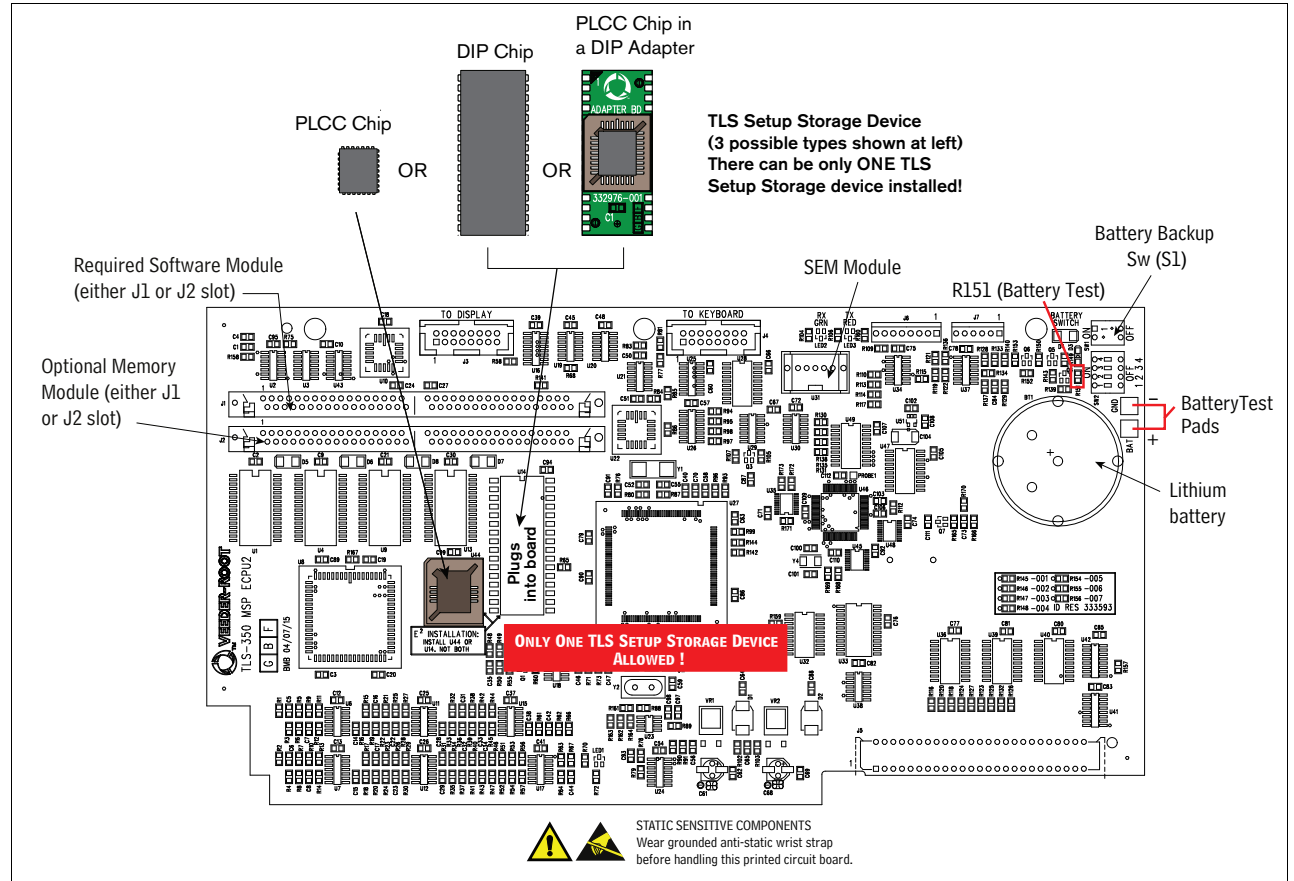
TLS-350 Console MSP ECU2 Board Layout
